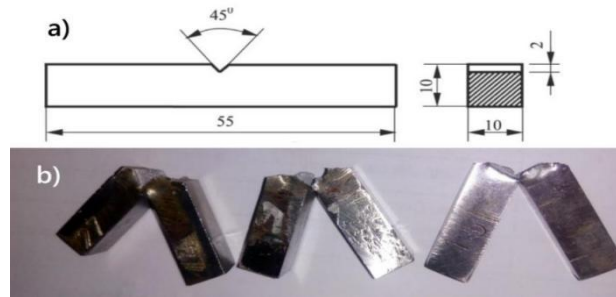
Standard Charpy impact test specimen. (a) A schematic illustration showing the dimensions of the impact specimen; (b) A photograph of the impact specimen.
